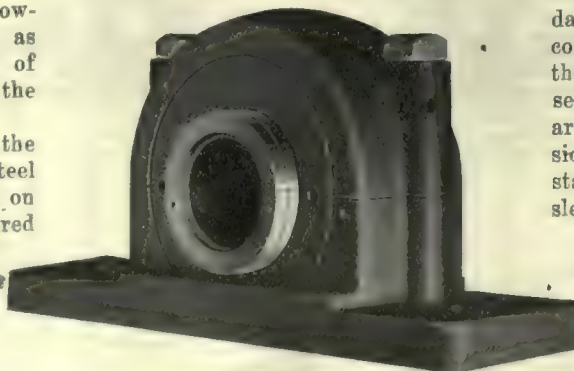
BALL-BEARING PILLOW BLOCK WITH SELF-ALIGNING BALL AND SOCKET CONSTRUCTION.
